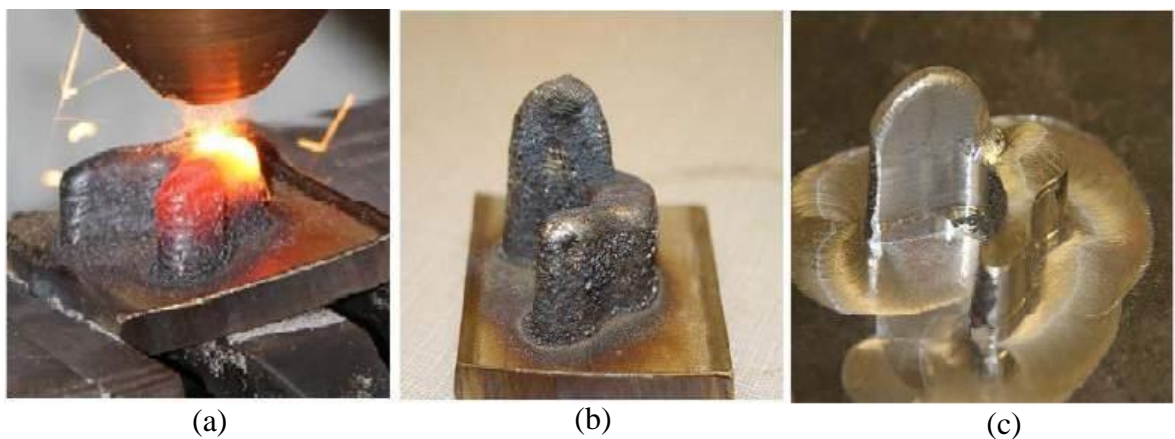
A 316L stainless steel part deposition from initial to final stage. Here, Figure (a) shows the layer-by-layer part deposition. Figure (b) shows the part just after deposition and Figure (c) shows the final part after finishing operation.
